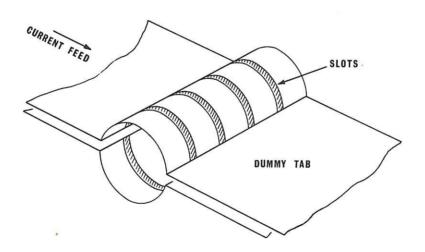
(b) (CLM-M43) Slotting of coil. (Suggested modifications of coil-collector assembly.)
